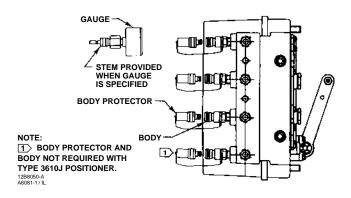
FlowScanner[™] Diagnostic System Connections for Type 3610J and 3610JP Positioners
